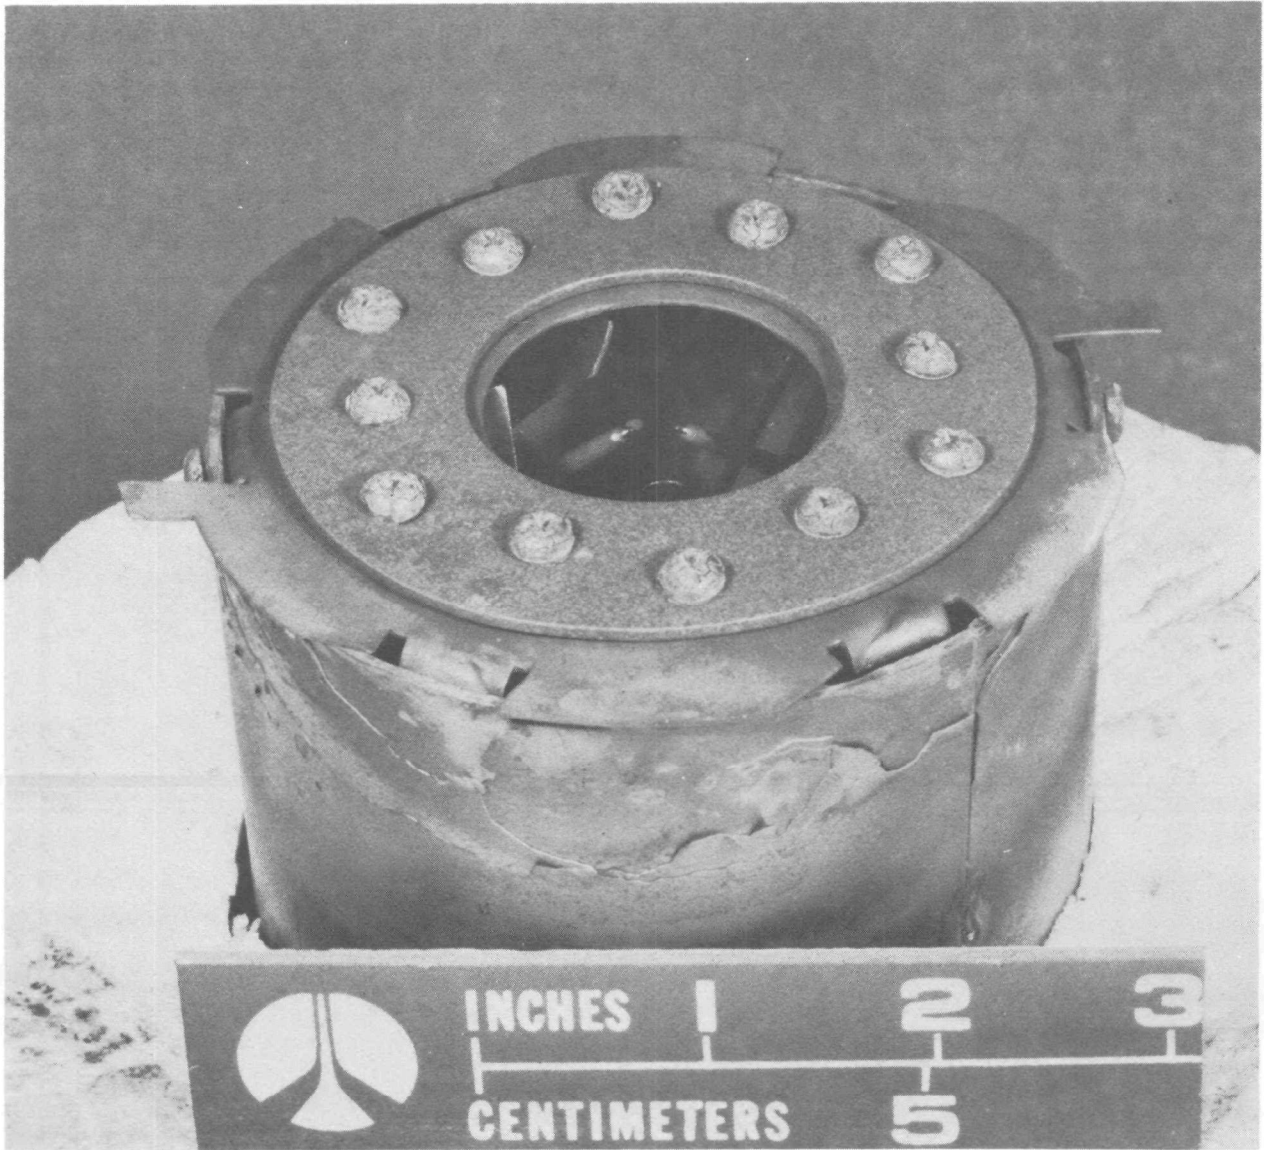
Photographs of the initial sheet metal design, prototype commercial heads after approximately 15 hours of cyclic service in a 0.22 m I.D. insulated side-fired combustor
